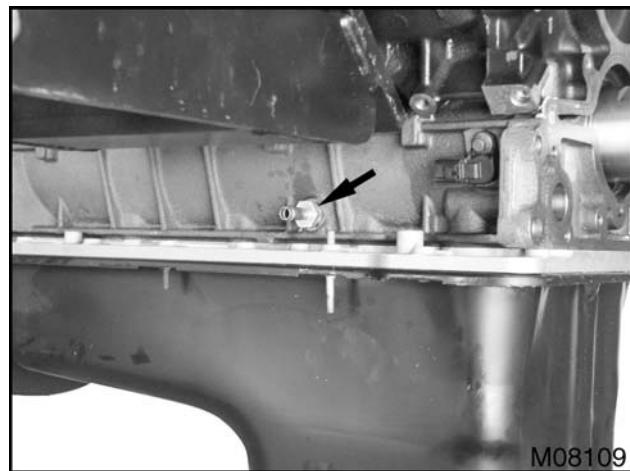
Breather oil drain assembly to crankcase M12 fitting
